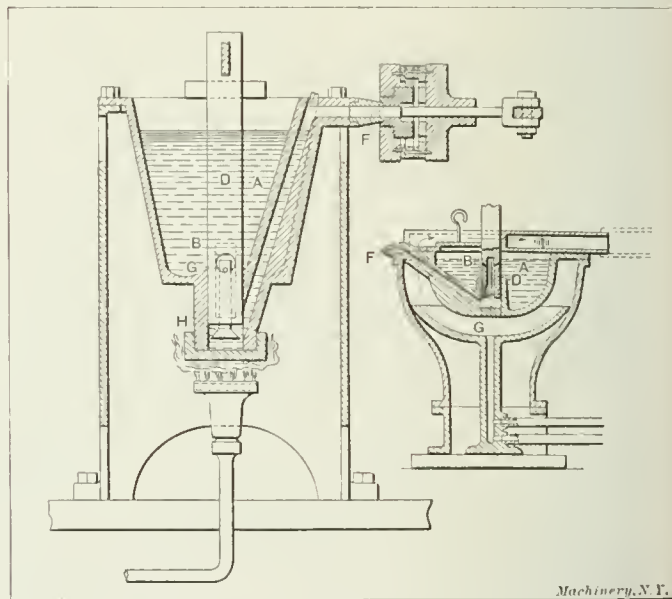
Die-casting Machine patented in 1892. Fig. 6. Improvement made in 1888 on Machine shown in Figs 1 and 2
